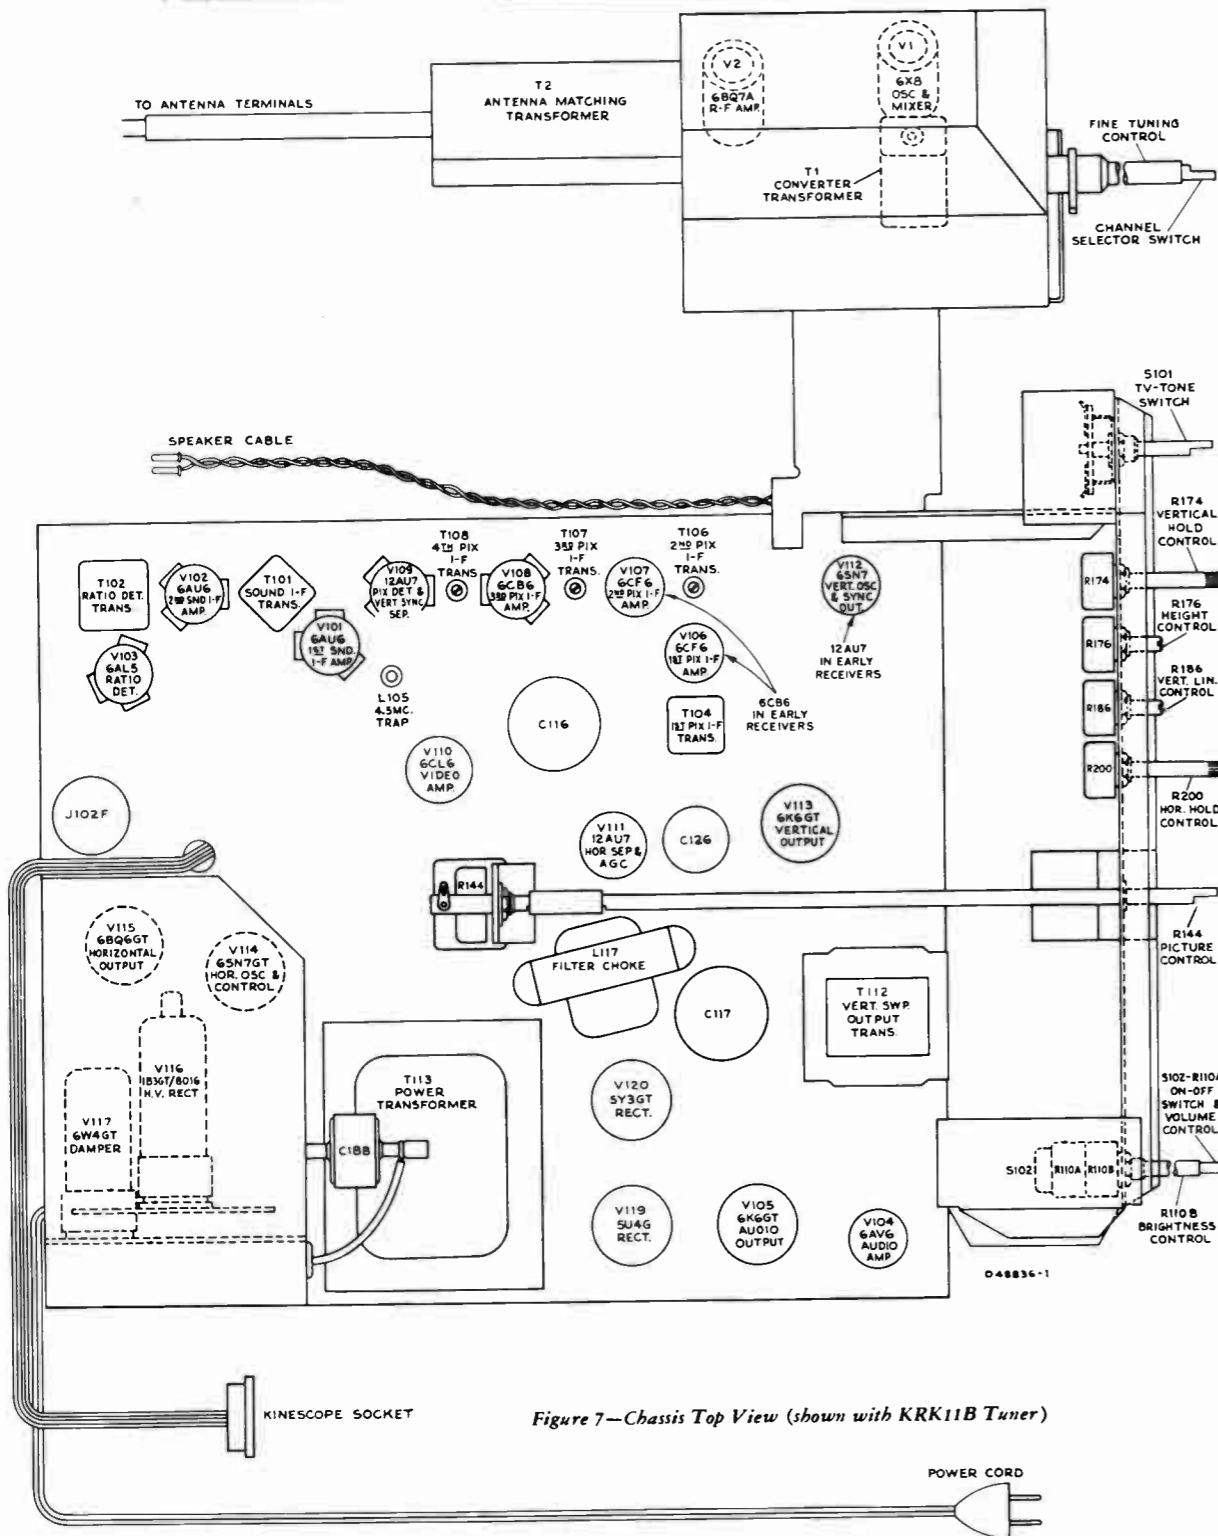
Chassis Top View (shown with KRK11B Tuner)
